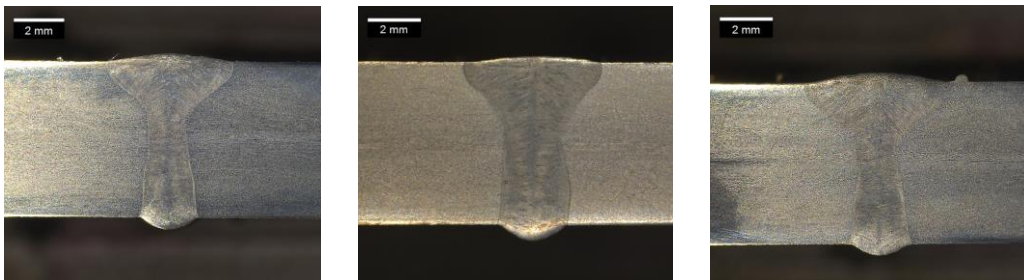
Macrograph of welding (a) 1mm above the surface ; (b) 2mm below the surface ; (c) 5mm below the surface
